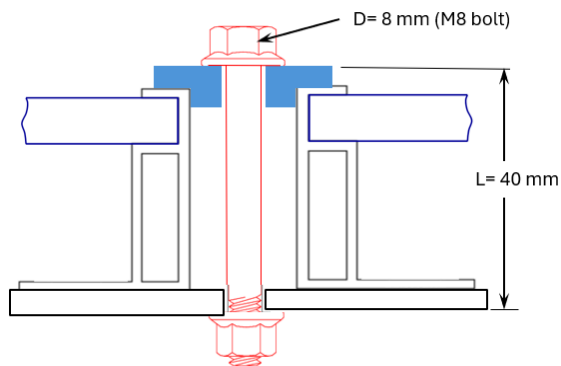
Typical PV Module Top-Down Clamp Bolted Joint
